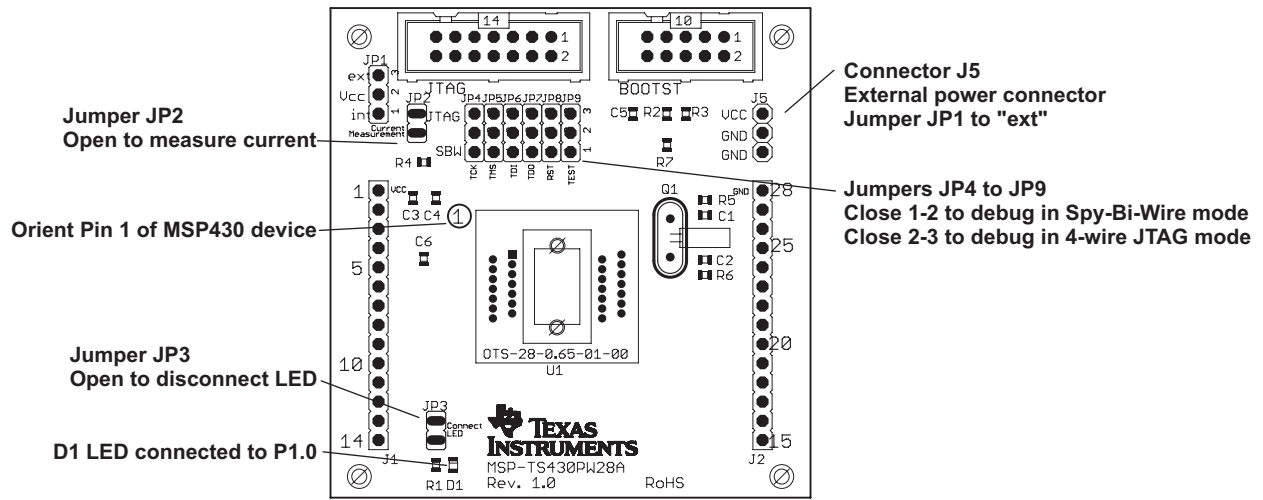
MSP-TS430PW28A Target Socket Module, PCB (Red)
